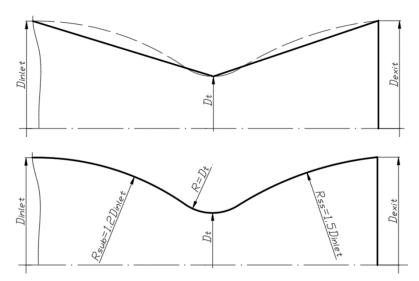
The Nozzles: conical and bell-shaped (recommended sizes)
